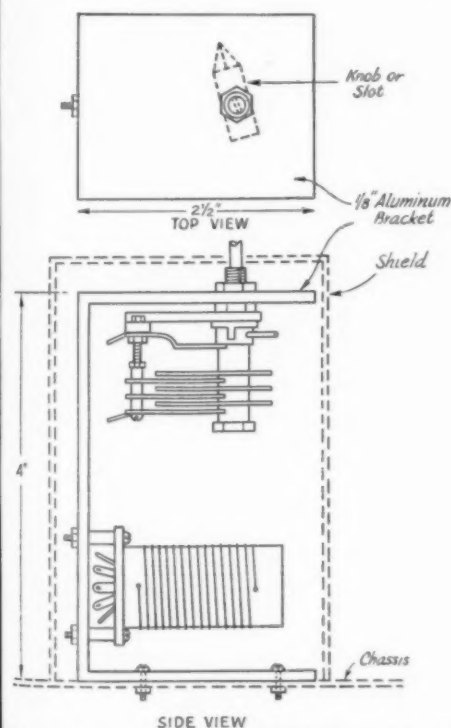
AN EASILY-CONSTRUCTED AND ACCESSIBLE TANK ASSEMBLY
